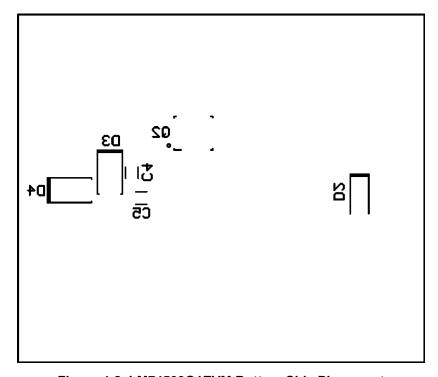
LM74500Q1EVM Bottom Side Placement
